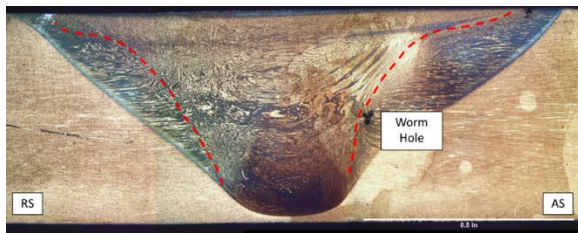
Cross section of development weld No. 3. This image depicts the last third of the weld where a worm hole defect was found.
